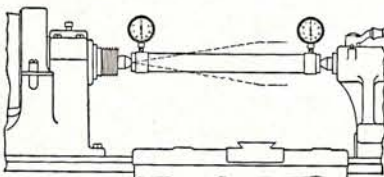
Testing the Height of the Headstock Spindle and Tailstock Spindle with Dial Indicator.
